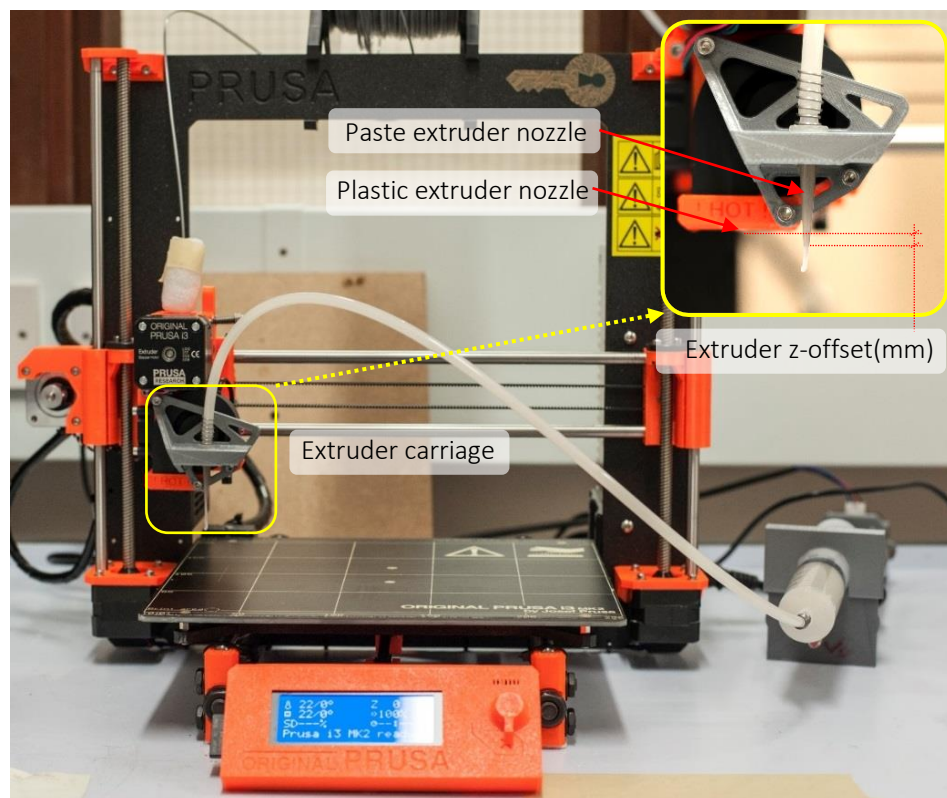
3D printer and extruder set-up; Extruder housing is shown in insert.
